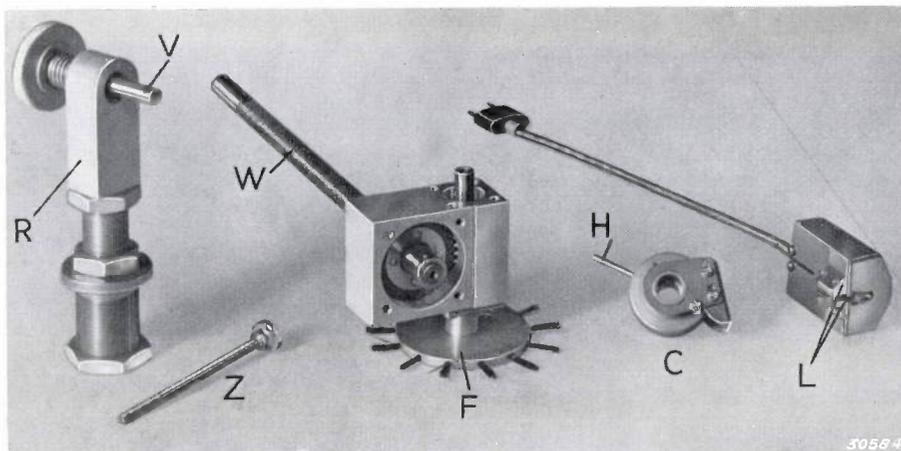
Parts of the transport arrangement. *F* flange which is set on the record to be cut; *Z* setting screw; *W* screw shaft which via a worm and pinion (visible in the opened housing) is driven by the motor axle. *C* bridge which carries the recorder (extreme right) and which is transported by the screw shaft *W* by means of a half nut (visible through the hole). The nut is pressed by a spring (*Q* in fig. 2) into the screw of the shaft *W*, it can however be lifted by means of the lever *H* in order to be able to move the bridge freely along *W*. *V* the pin which is screwed into the support *R* and forms the outermost bearing of the shaft *W*.
